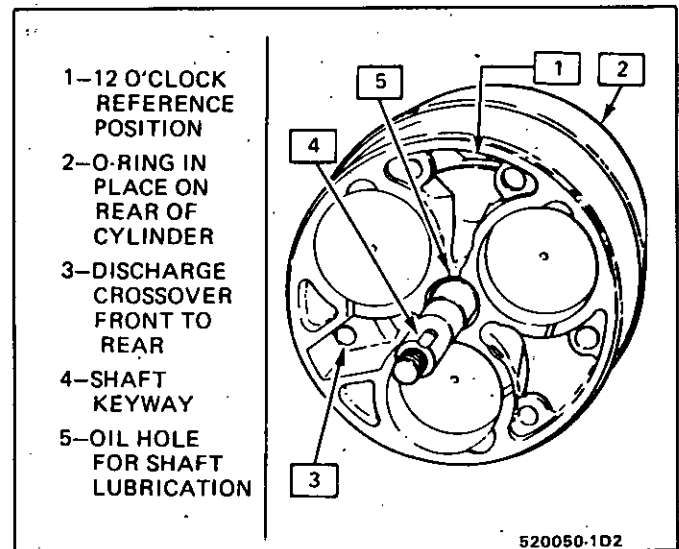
Front View and Detail of DA-6 Cylinder and Shaft Assembly
